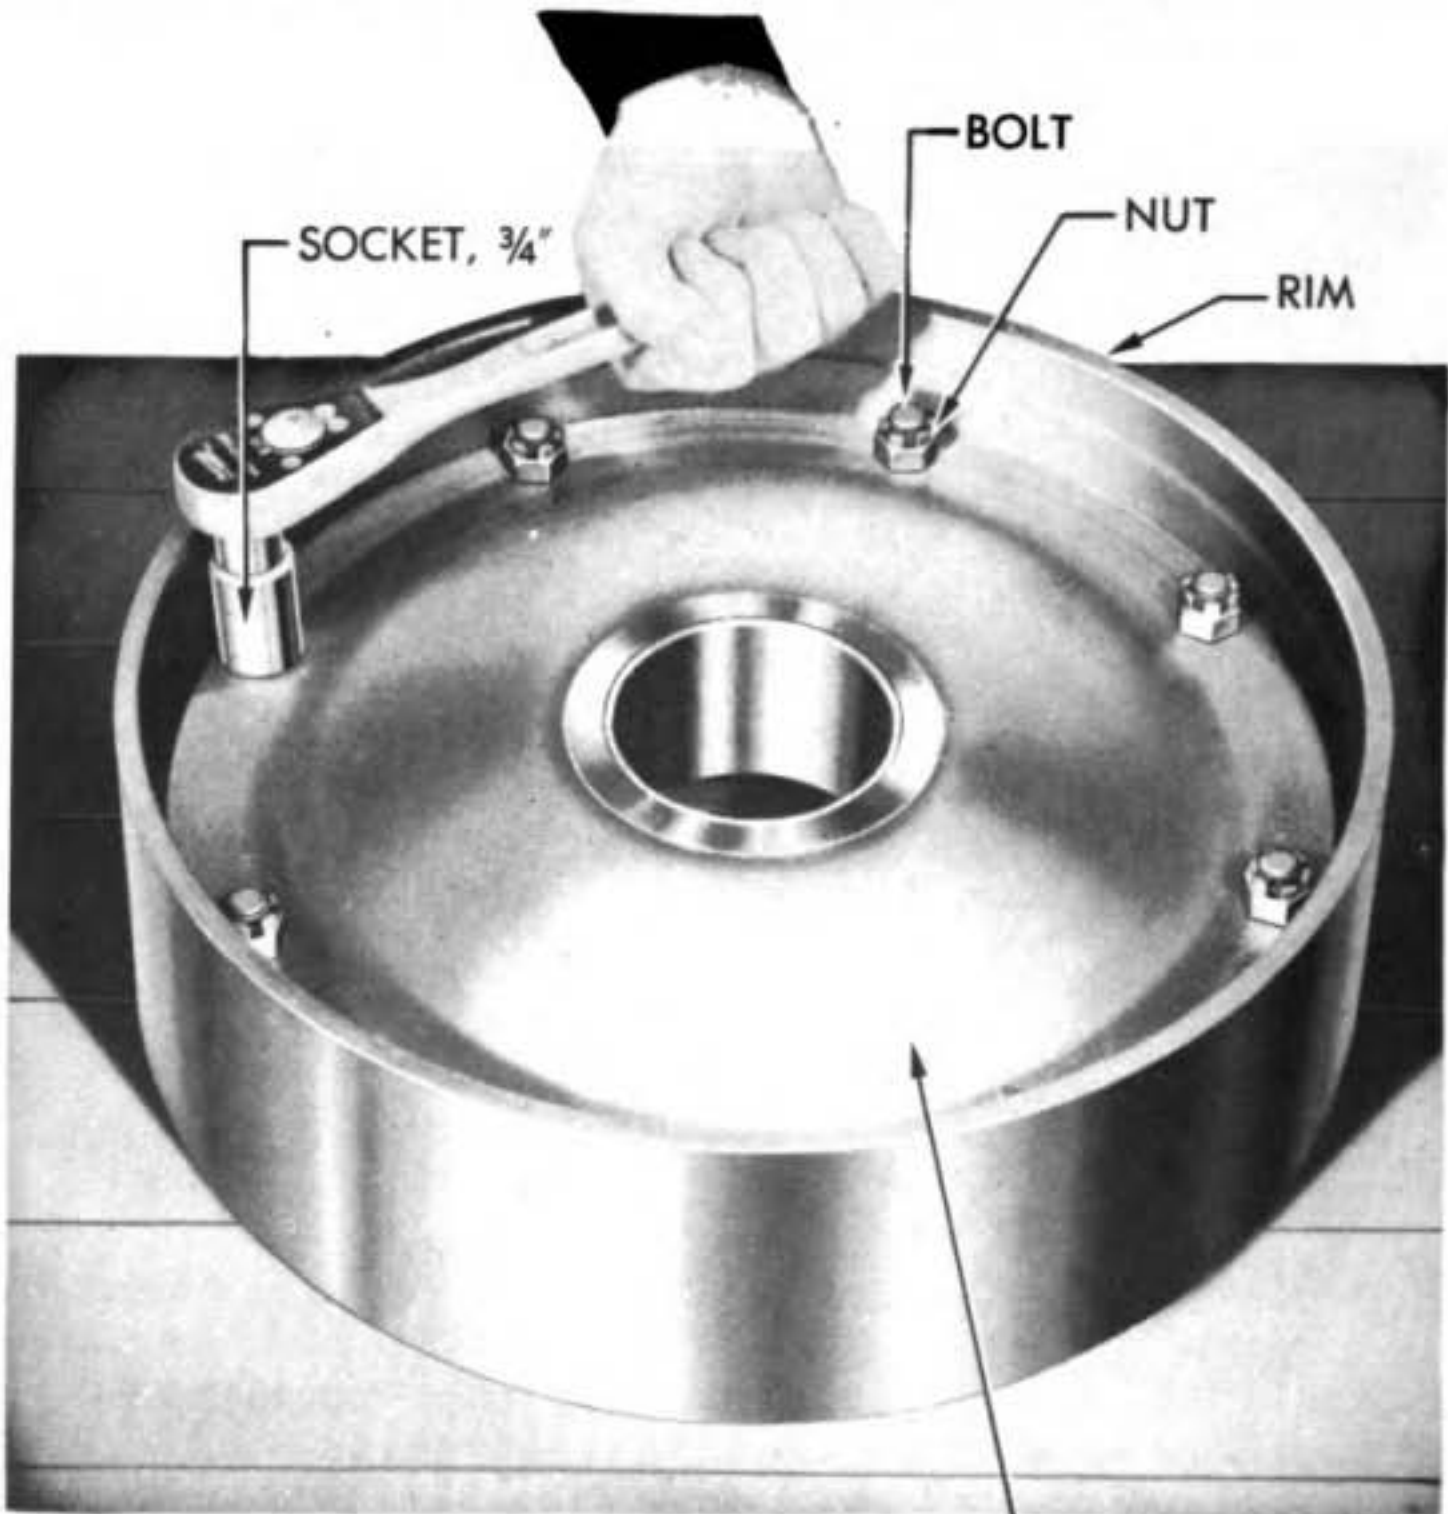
Removing Steering Brake Drum Rim and Gear Flange
